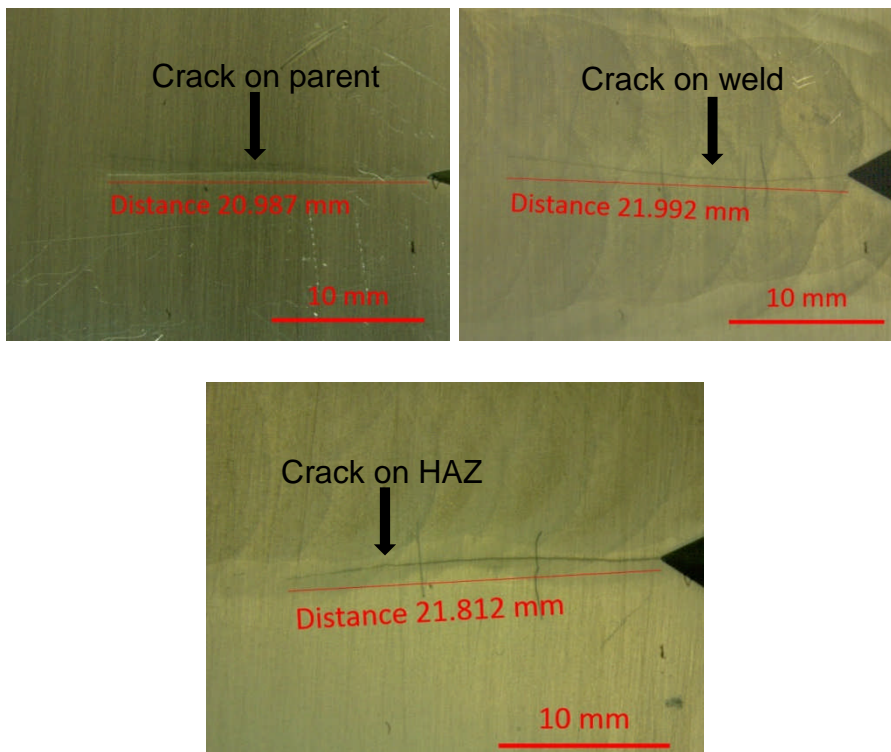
Crack growth in parent, weld and HAZ materials
